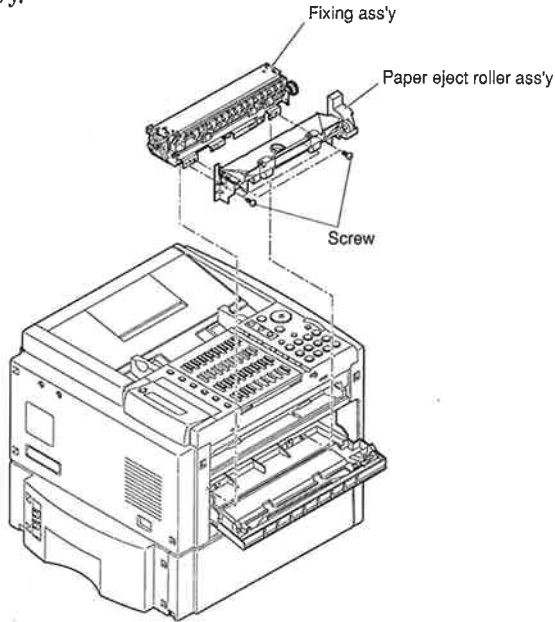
Disassembly Procedure (Fixing ass'y)
